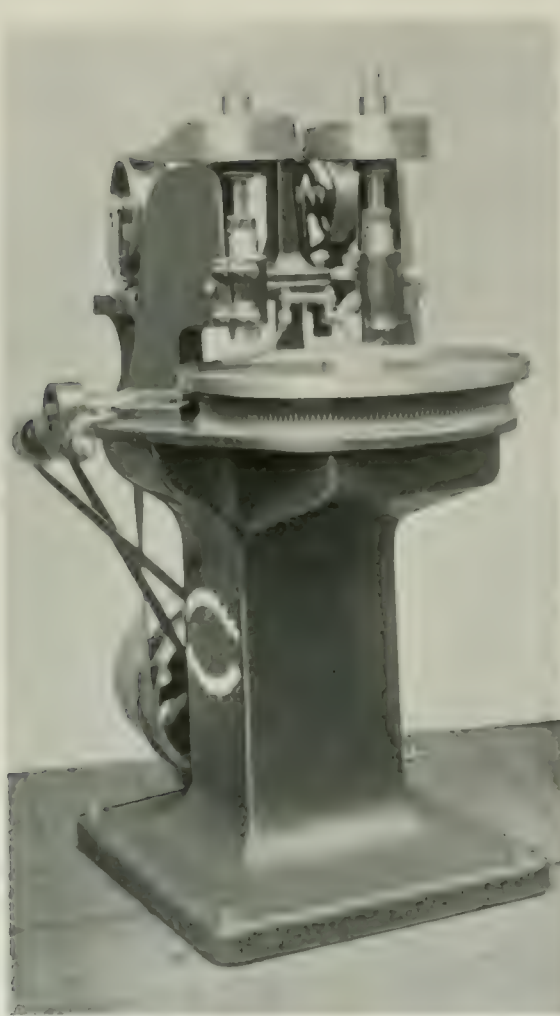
SINGLE-SPINDLE VERTICAL MILLING MACHINE.
